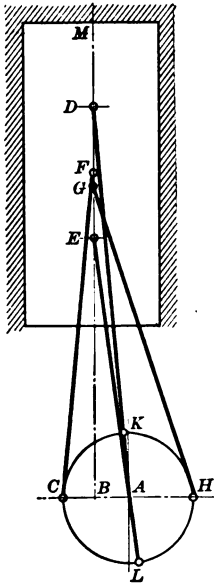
SHOWING CYLINDER OFFSET IN WESTINGHOUSE SINGLE-ACTING STEAM ENGINE
